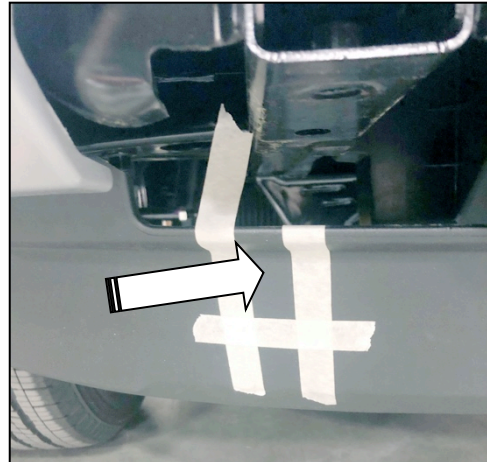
Models with steel skid plate, temporarily remove skid plate to access tow hooks
